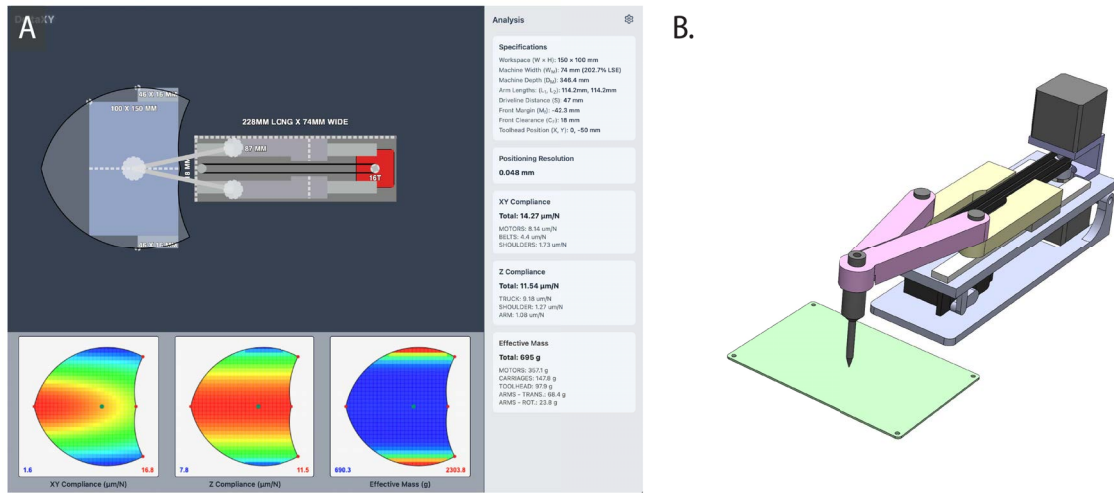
A preliminary design for an automated solder paste dispenser’s positioning mechanism. A) The end result of the DeltaXY exploration process. B) A rough CAD model that was guided by the design tool output.
